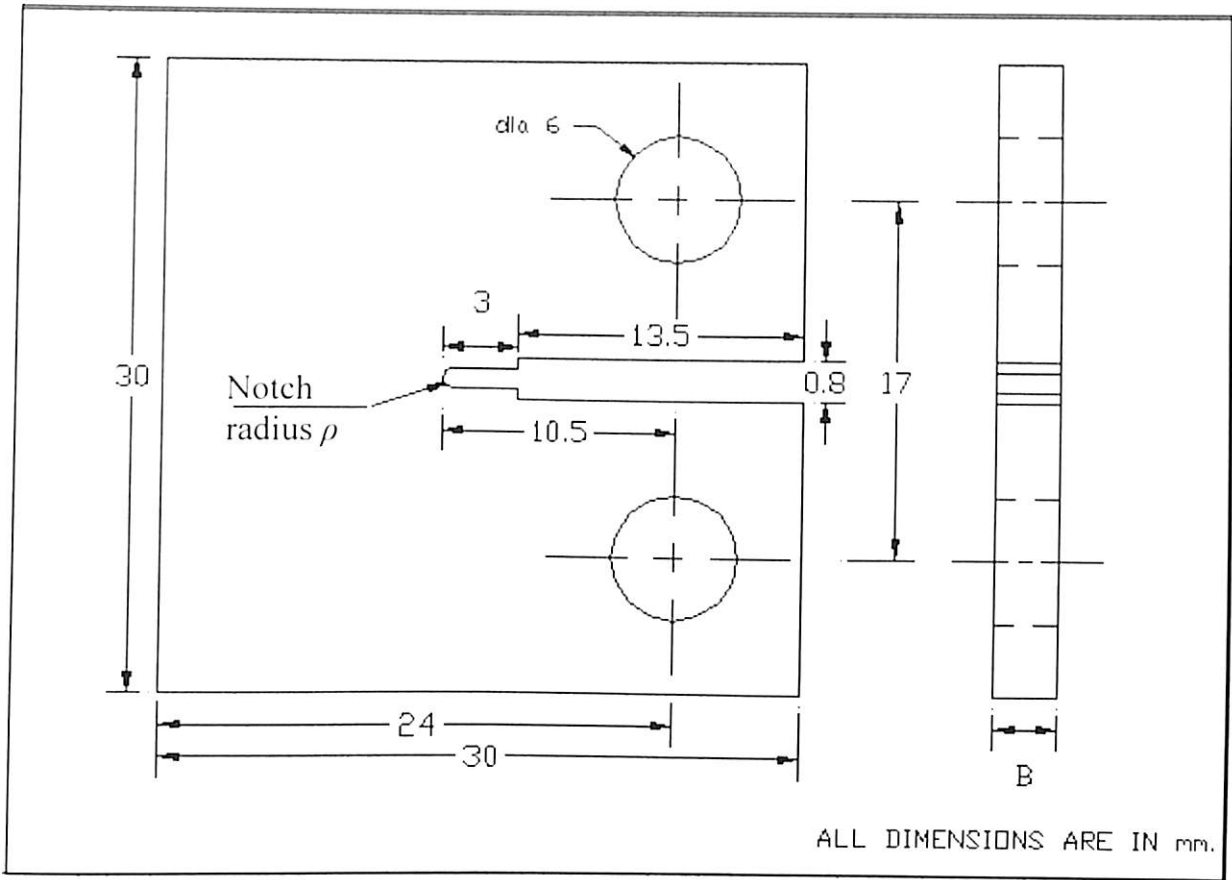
(a) Geometry of the test specimens used in fracture test as per ASTM E 399-91.
